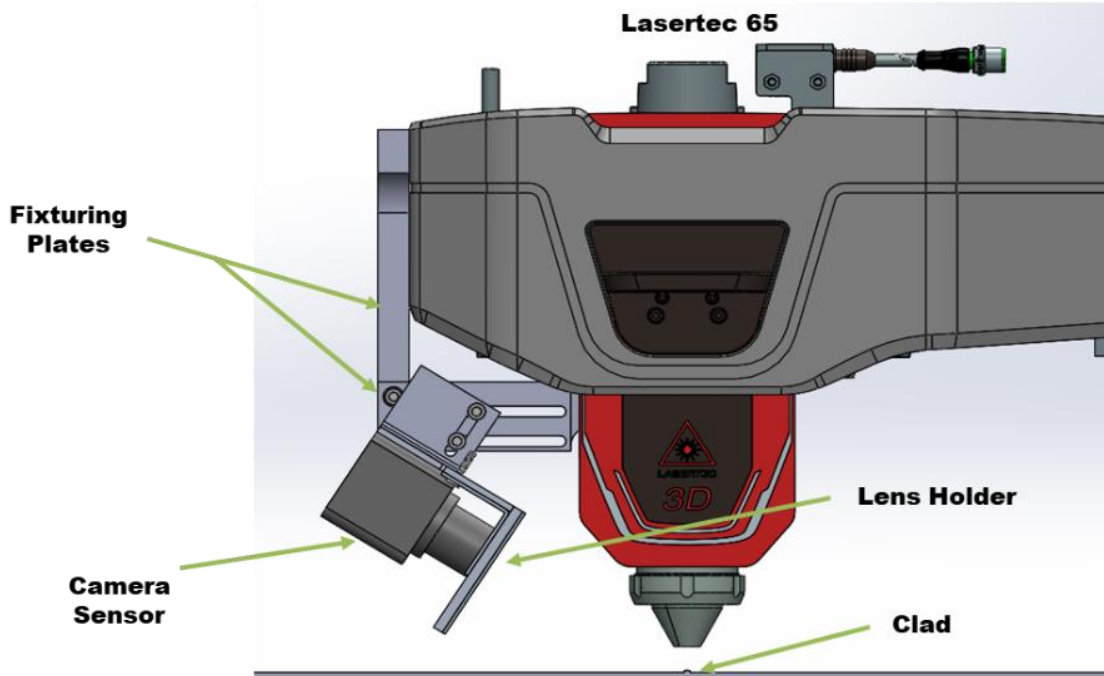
CAD Screenshot of the Camera Fixture Assembly
